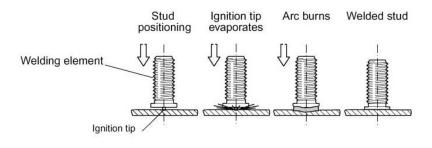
Stages of tip-ignition stud arc welding [23]
